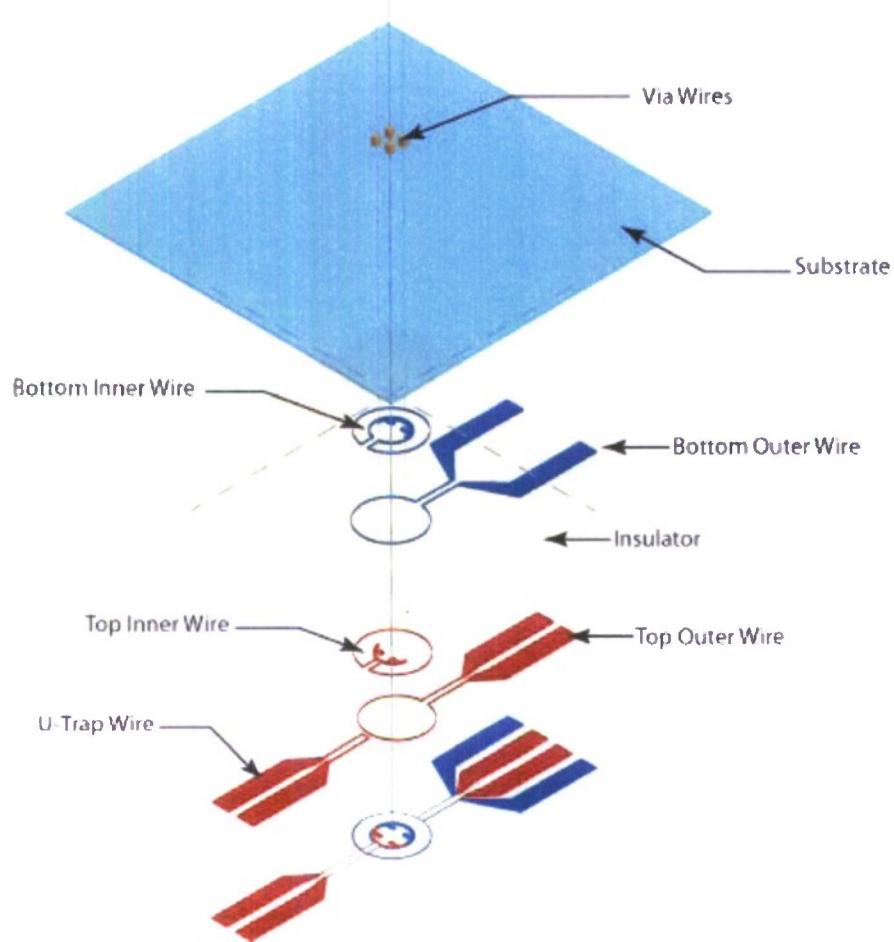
Exploded view 4-Wire Off -Axis Ringtrap Microchip.
